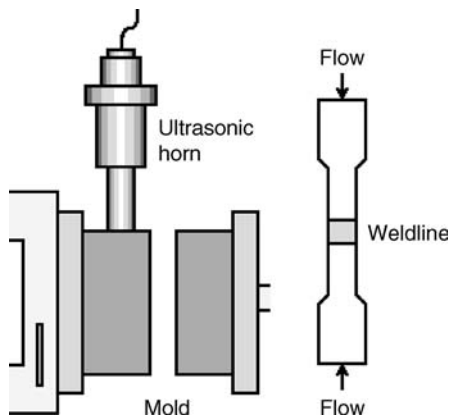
Schematic of injection molding machine equipped with an ultrasonic device [62].
